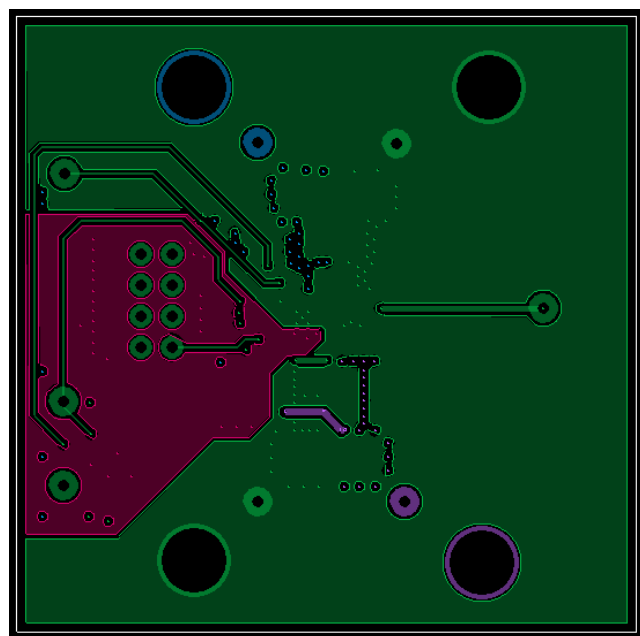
INNER LAYER 2 (TOP VIEW)
